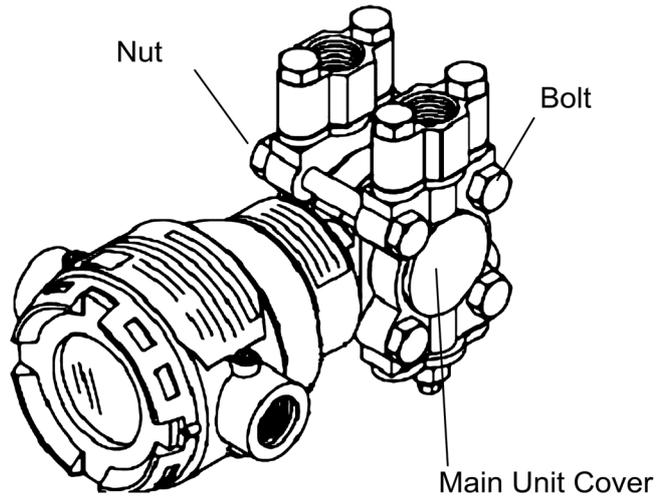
Nuts and Bolts Fastening the Main Unit Cover
